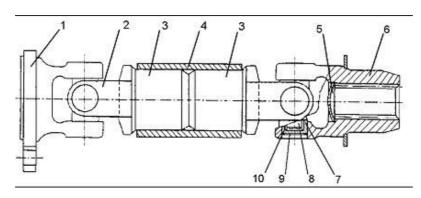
Front axle drive shaft – longitudinal section 1- flange; 2- articulated joint; 3- fork; 4- tube; 5- stopper; 6- fork; 7-
